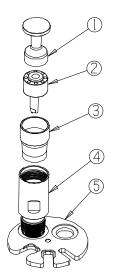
HH79 Inserting Shock Absorber into End Cap
